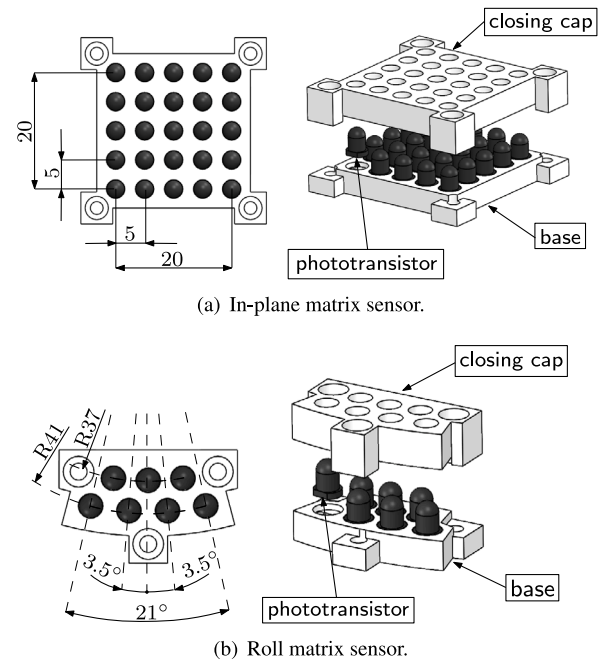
Matrix sensors: front view (left) and exploded view (right).
